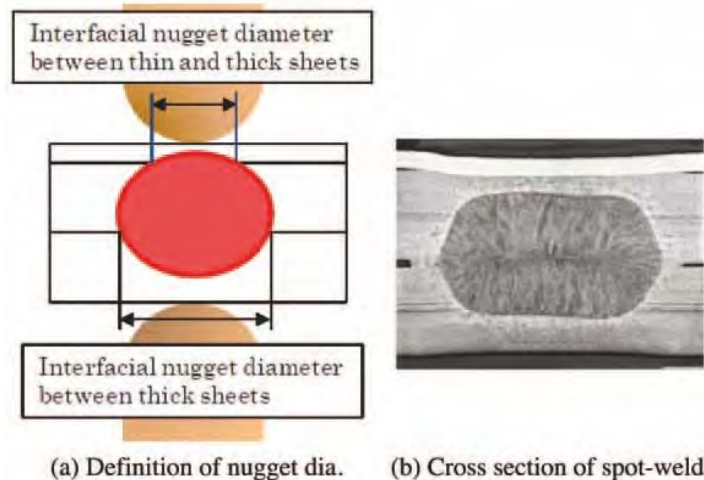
E-1: Three sheets spot welded.^{N-5}
